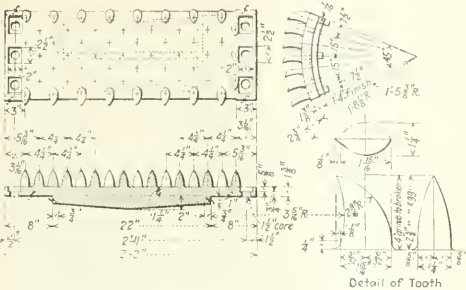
HAWK-BILL TOOTH AND ITS SETTING
